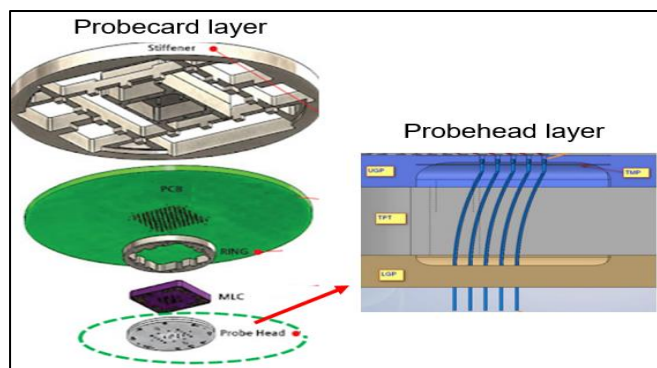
Exploded view of Probecard showing layered components: stiffener, PCB, ring, MLC and Probehead with needle.
